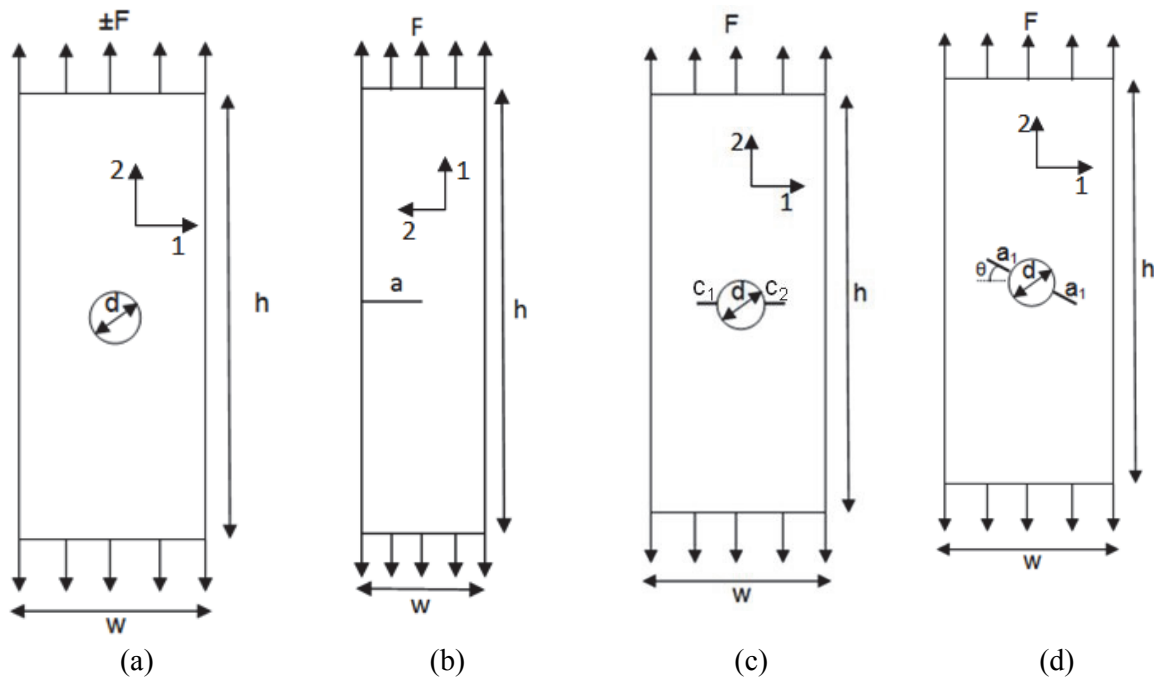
Details of specimen (a) finite plate with circular cut-out, (b) finite plate with edge crack (c) finite plate with multiple through crack and cutout, (d) finite plate with multiple slanted edge crack and cutout shown in Figs.1 (a-d)
